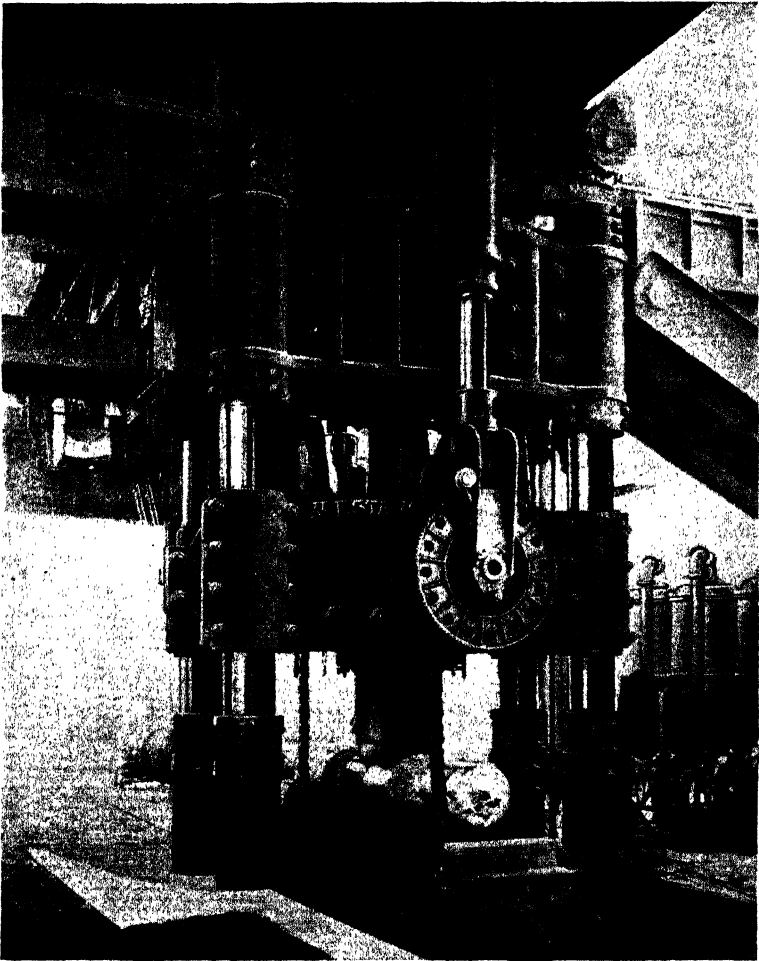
IX.—Fourteen-thousand-ton steam hydraulic forging press. (*Courtesy of The Mesta Machine Co.*)
